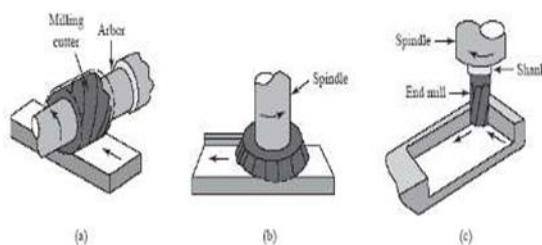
Milling process (a) peripheral milling (b) face milling, (c) finger milling
